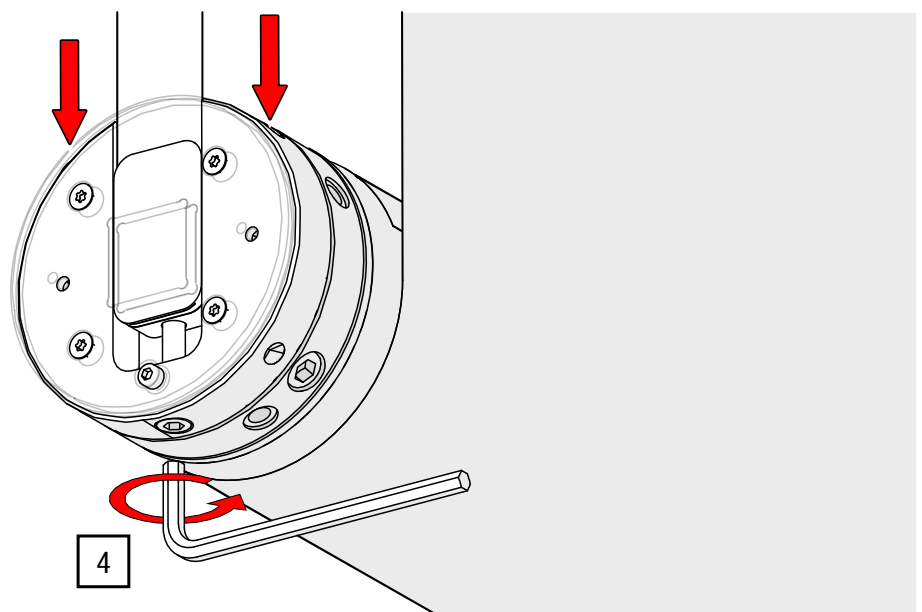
Setting the levelling – Adjusting the winding shaft downwards
